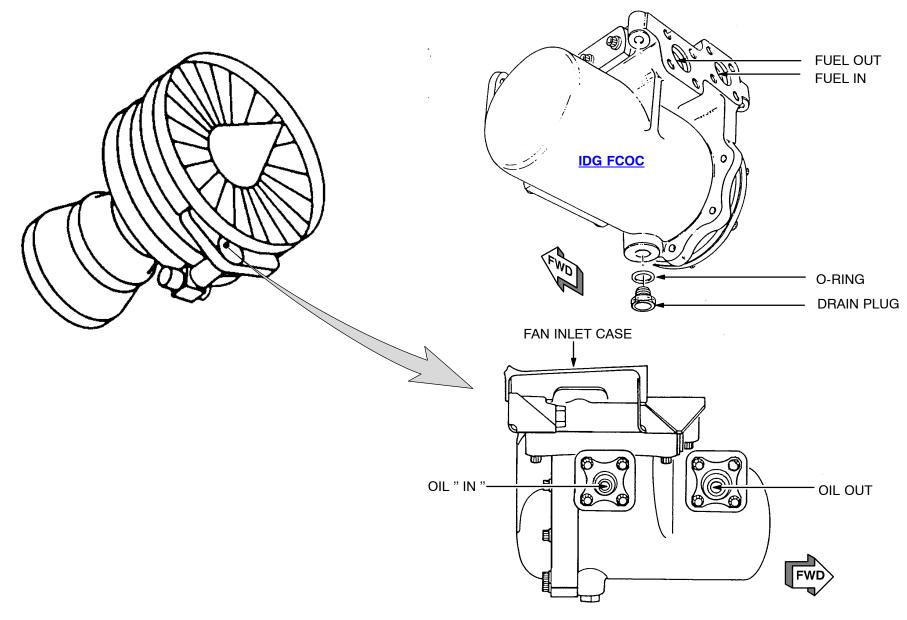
IDG Oil Cooler 09|73-10|IDG Cool|5A|L3/B1
